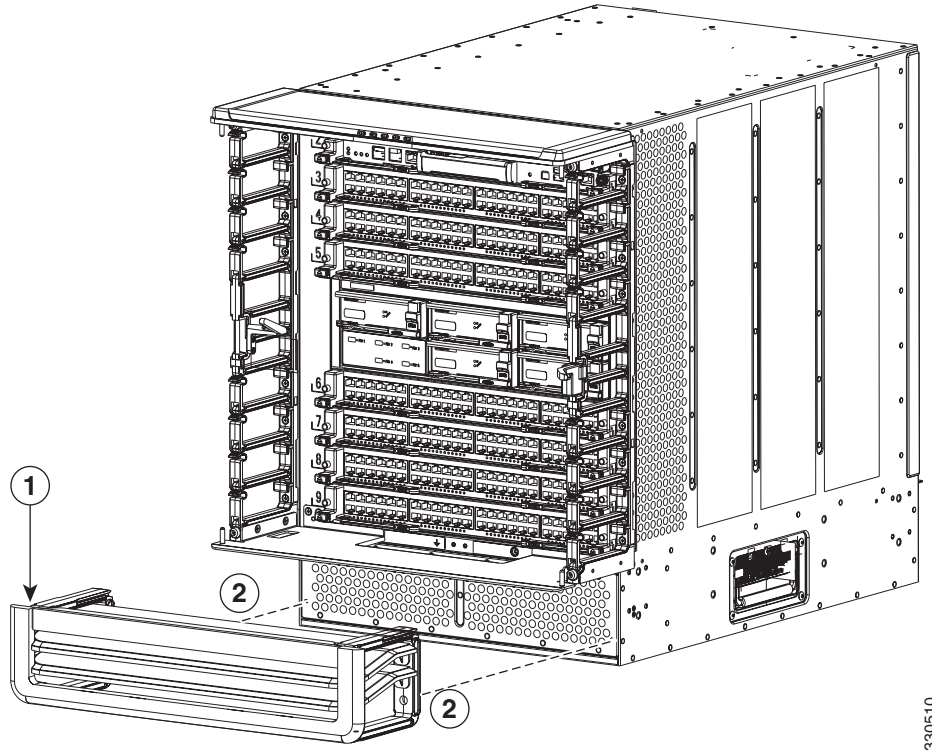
Attaching the Hinge Bracket to the Cable Management Frames and Chassis
